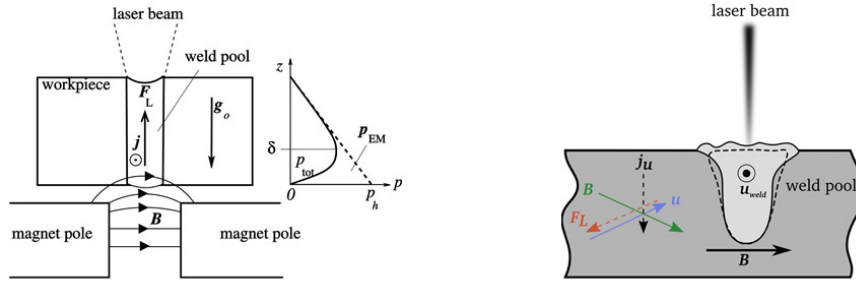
Schemas of the inductive weld pool support (left) and the Hartmann effect (right) in high power laser beam welding.
